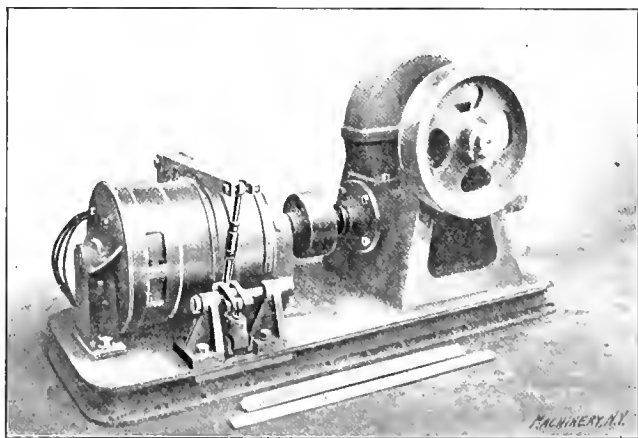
Application of One-speed Spinner Motor to Haulage Gear
